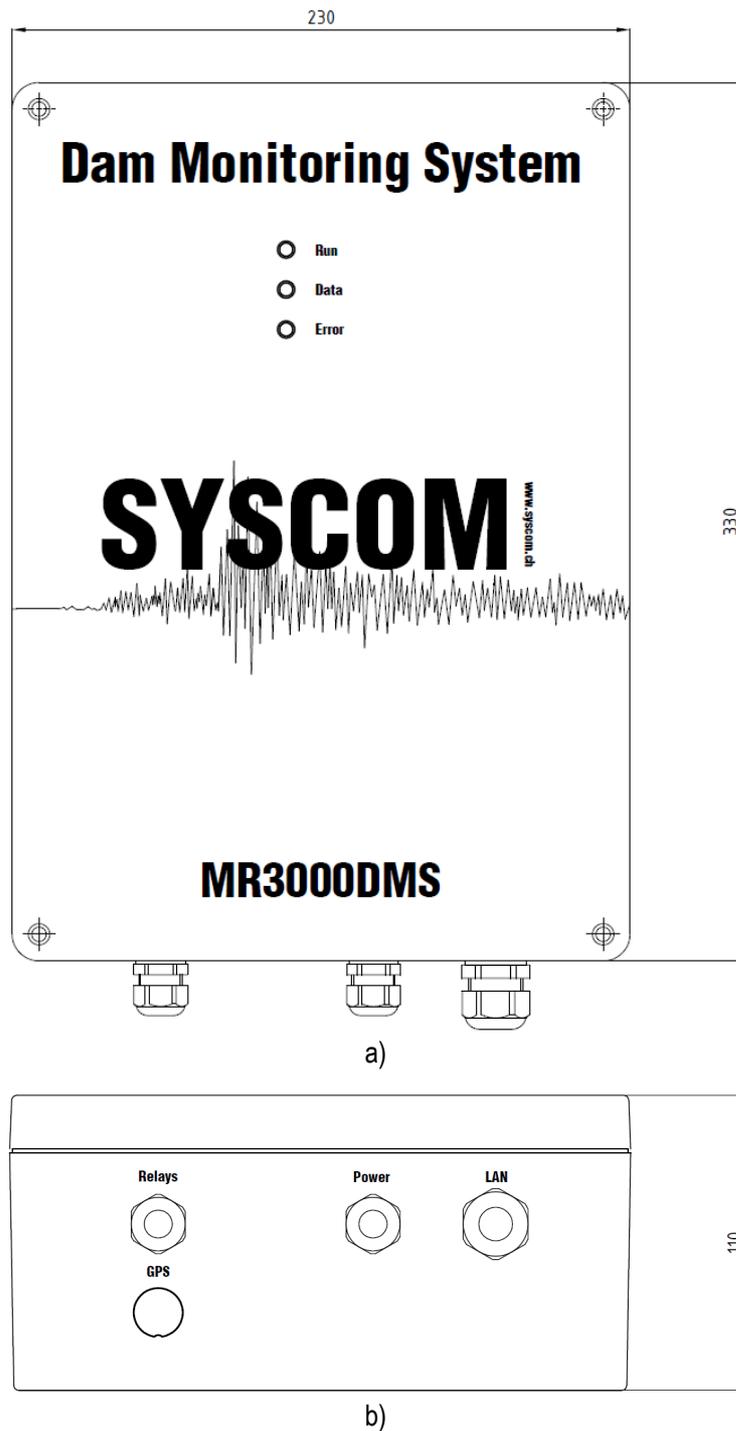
Mechanical drawings of them MR3000DMS: top view (a), front view (b).
